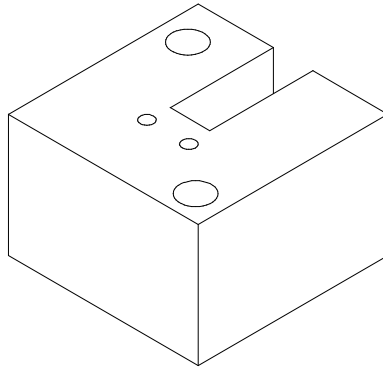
A Schematic of a fixture for holding the two legs of the tip holder.
